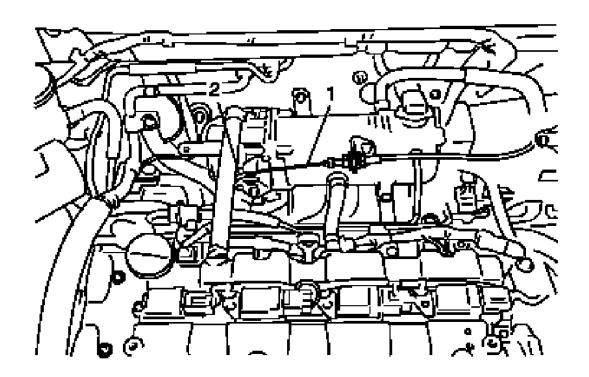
Connecting Accelerator Cable To Throttle Valve Lever Courtesy of SUZUKI OF AMERICA CORP.
